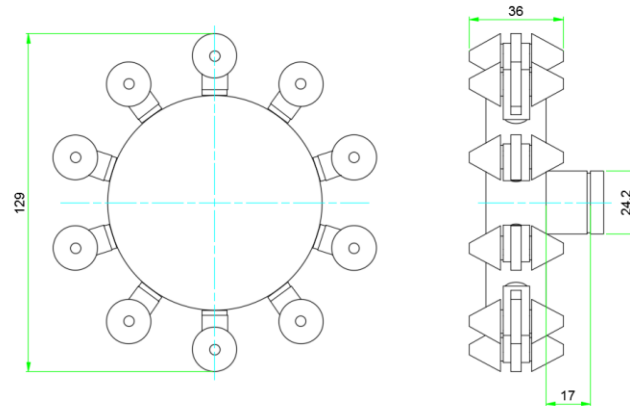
General dimensions of wheel manufactured at TU Ilmenau. The rollers on this representation have an angle $\delta = 0^\circ$
